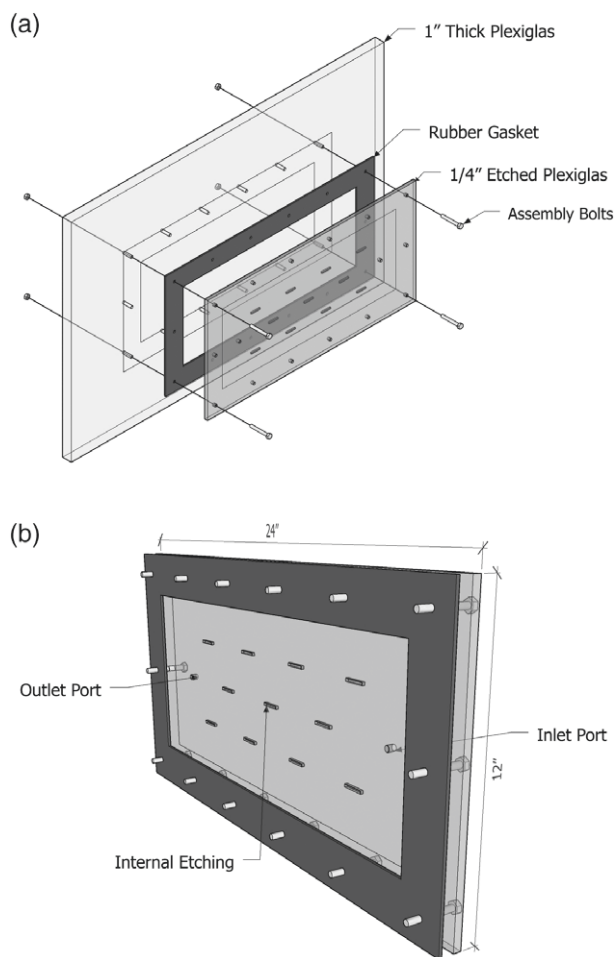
Fracture apparatus design drawings. (a) Isometric view of complete fracture assembly (some bolts removed to simplify diagram). TLC sheet is adhered to the 1" thick Plexiglas back, on the side facing away from the viewer. (b) View of interior of flow cell before attachment to Plexiglas back.
